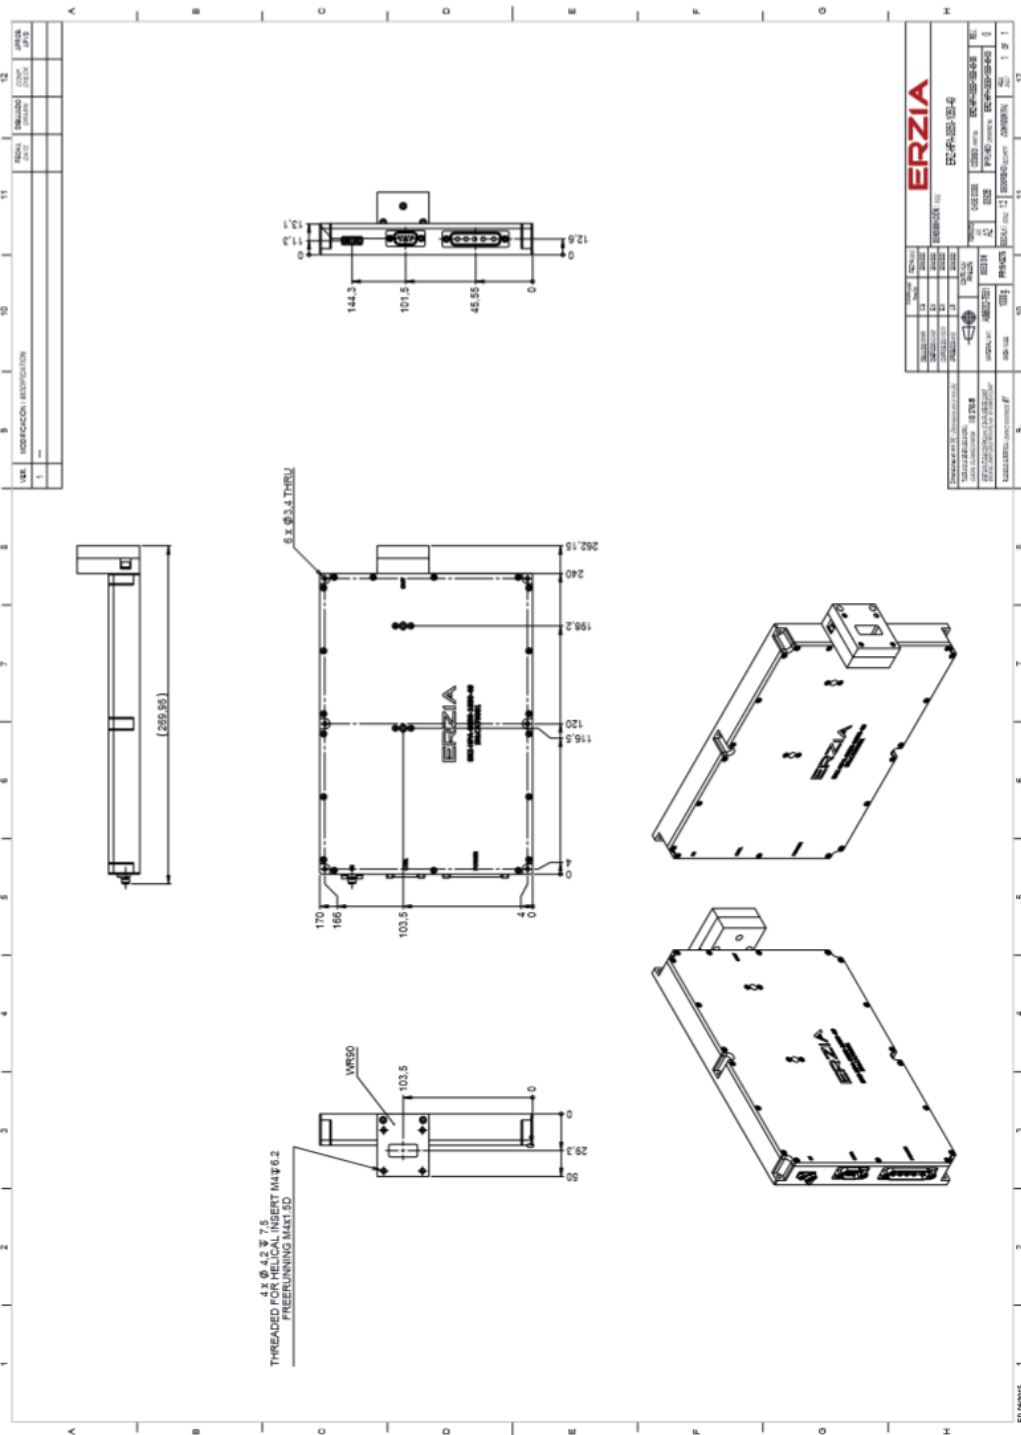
ERZ-HPA-0850-1050-49 Outline Drawing
